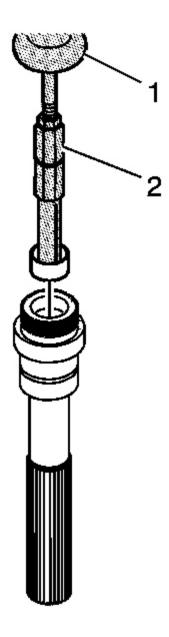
Using J 2619-01 & J 45548 To Remove Mainshaft Rear Support Bushing Courtesy of GENERAL MOTORS CORP.
